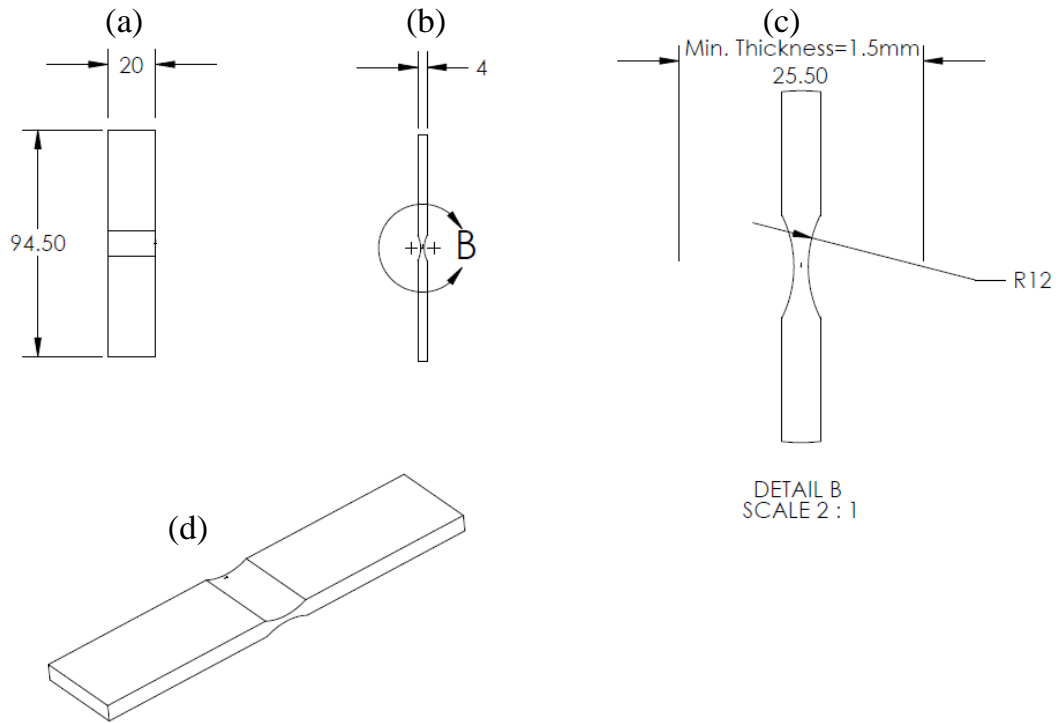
Dimension of carbon fiber composite. (a) front view (b) left view (c) detailed view of notch part (d) overall view of specimen
